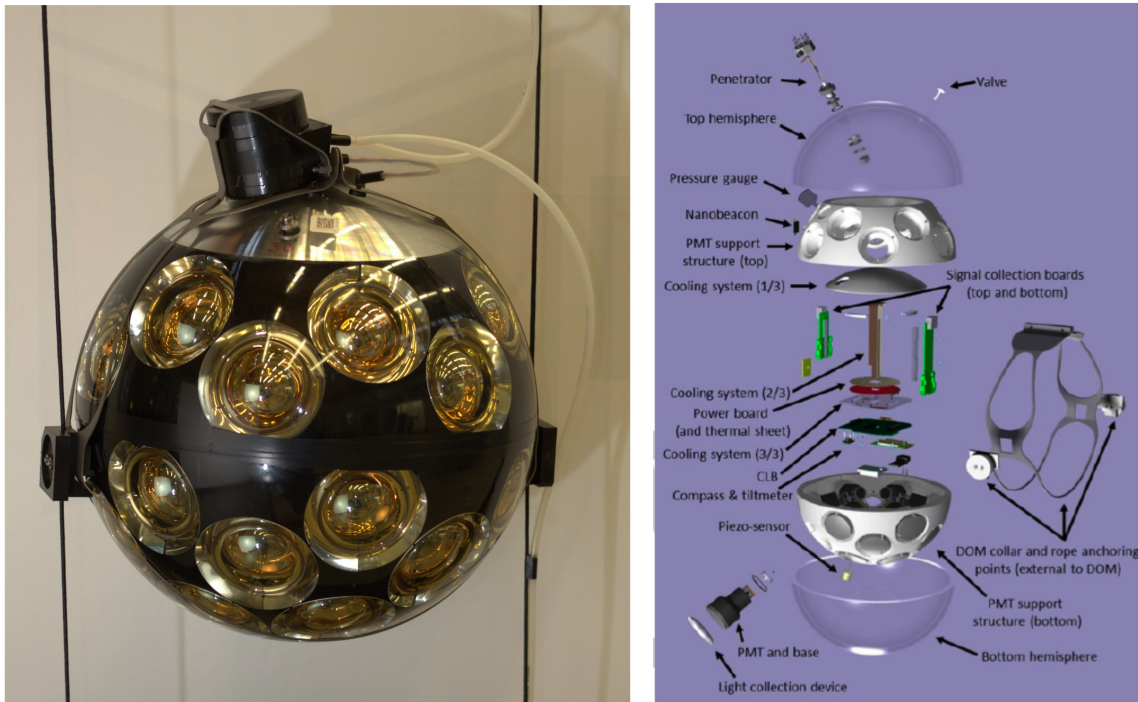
Photograph (left) and an exploded view (right) of a DOM. Taken from [3].
